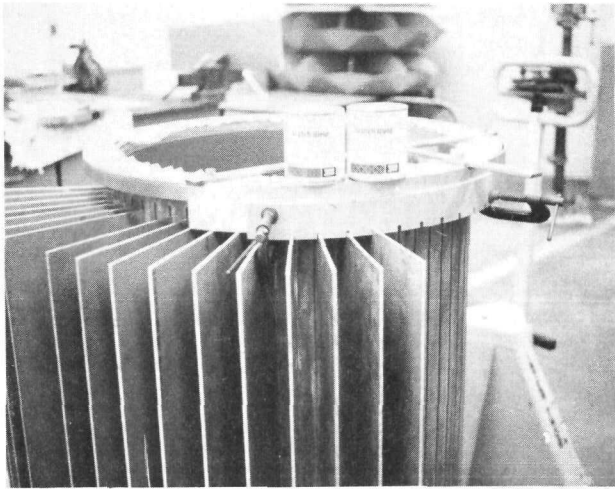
Special fixtures and adhesives were used to attach the aluminum fins to the stainless steel cask body.
